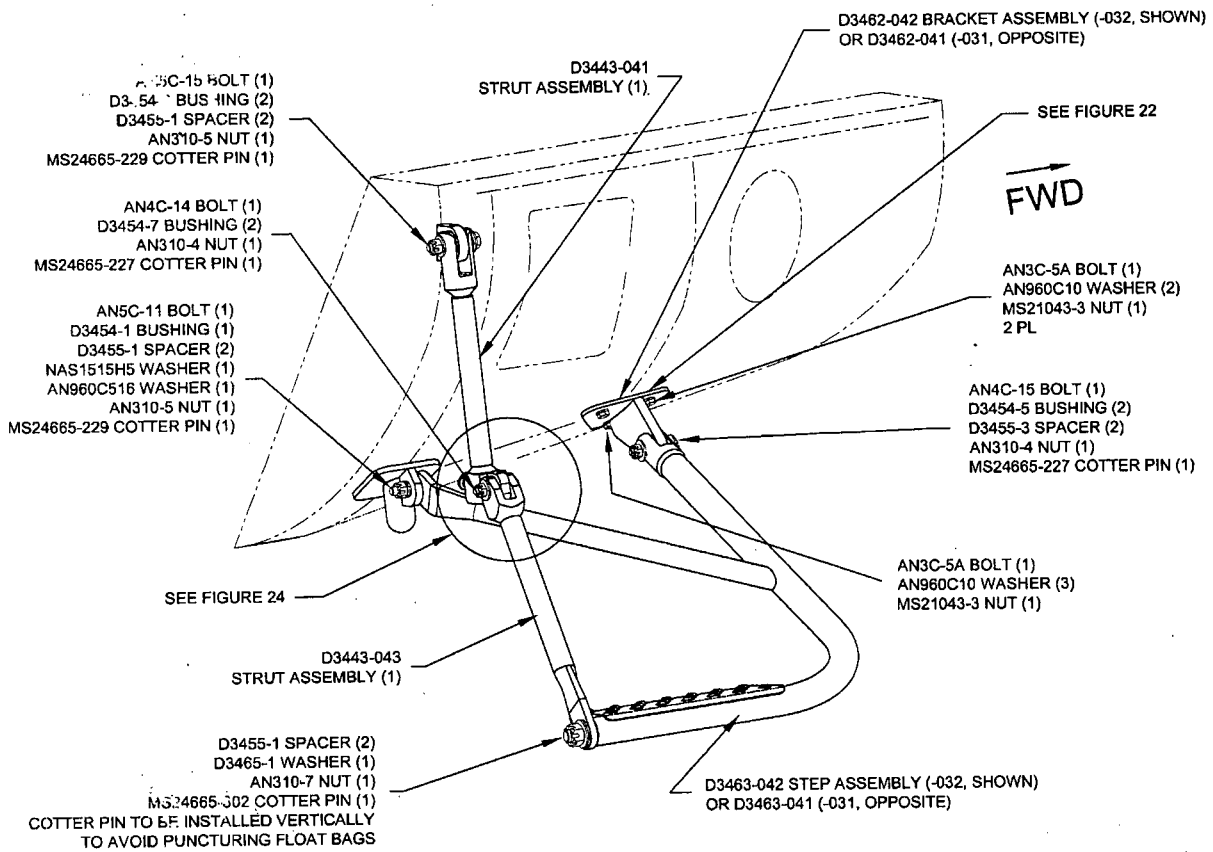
Isometric View D412-630-032 RH, Pilot/Co-Pilot Folding-Step Installation (Shown)
